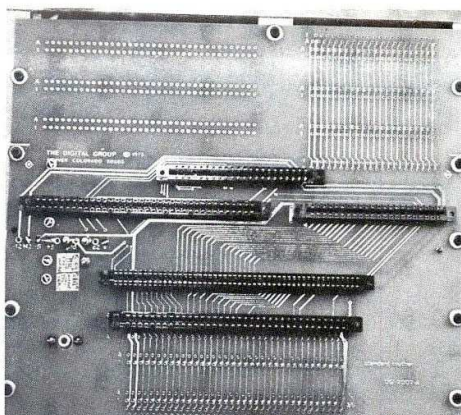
Mother Board Top View. Top to Bottom—3 Spaces for Peripheral or I/O Boards, TVC, I/O, CPU, Memory, Spaces for 2 More Memory Boards. Smaller Mother Board is Like This but Cut Off Just Above and Below Existing Sockets.
